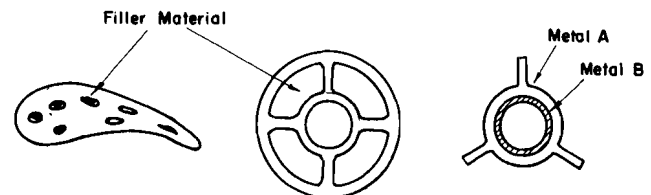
EXAMPLES OF HOLLOW SECTIONS PRODUCED BY EXTRUSION AND LEACHING
